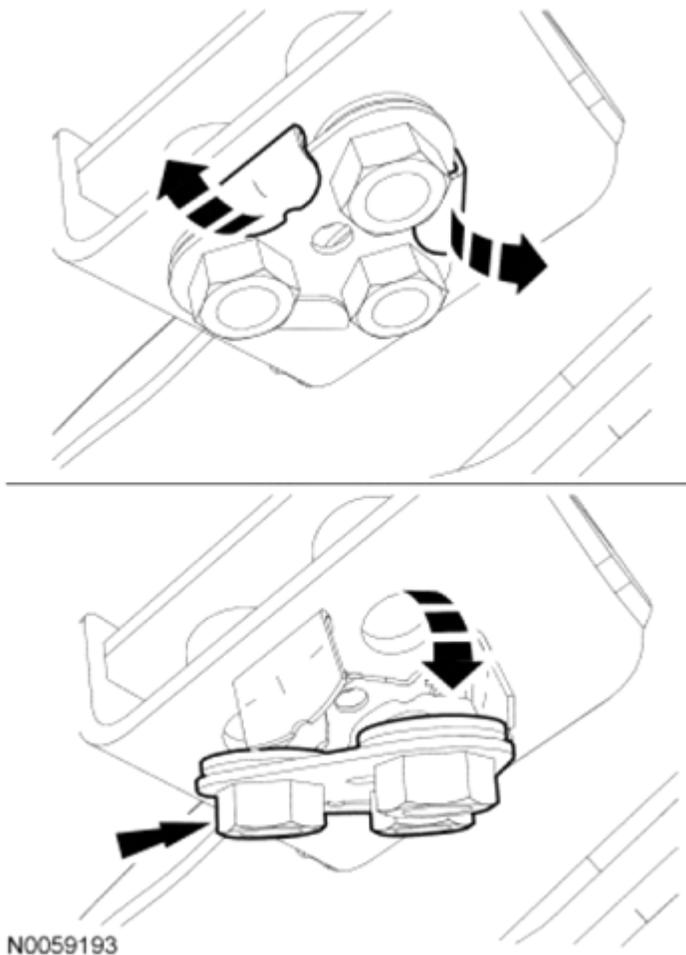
Removing Engine Support Insulator-To-Cylinder Block Bracket And Bolts LH
